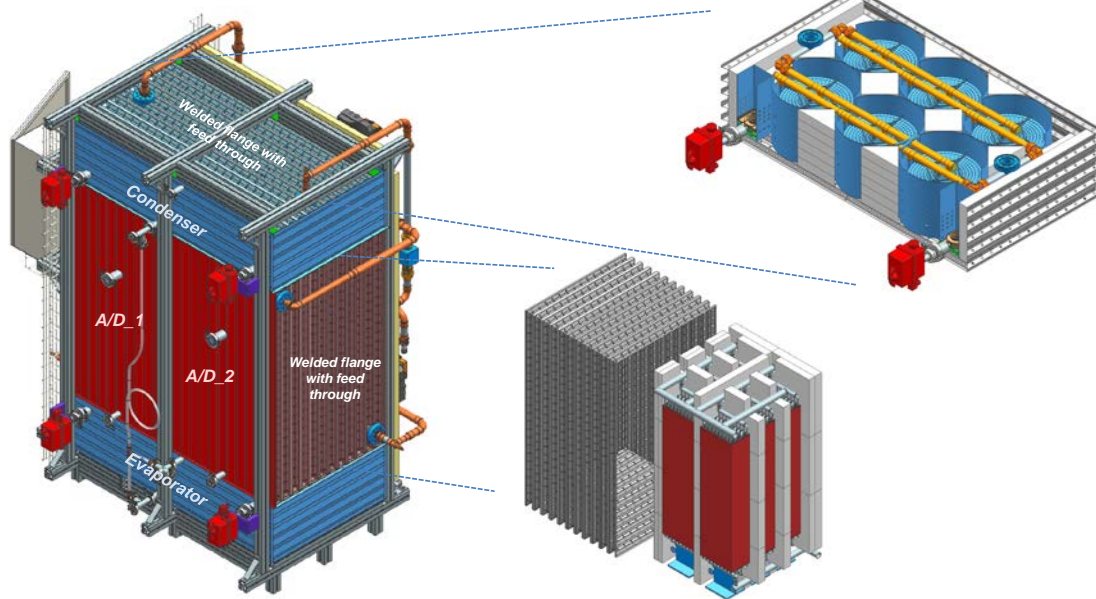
CAD view of the four chamber adsorption heat pump with exploded view of the Condenser unit (top right) and of an A/D unit (bottom right).
